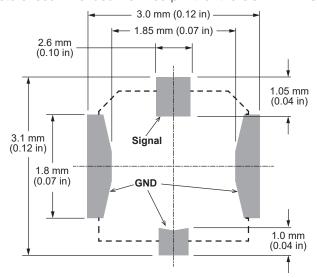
Recommended PCB Dimensions for the CONMHF1-SMD
